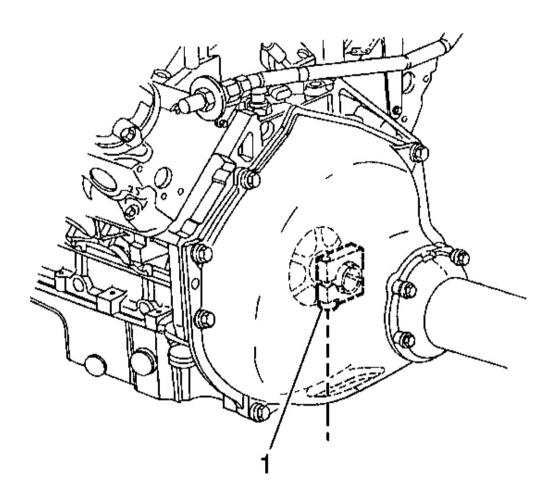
Propeller Shaft Hub Clamp & Bolt Courtesy of GENERAL MOTORS CORP.
